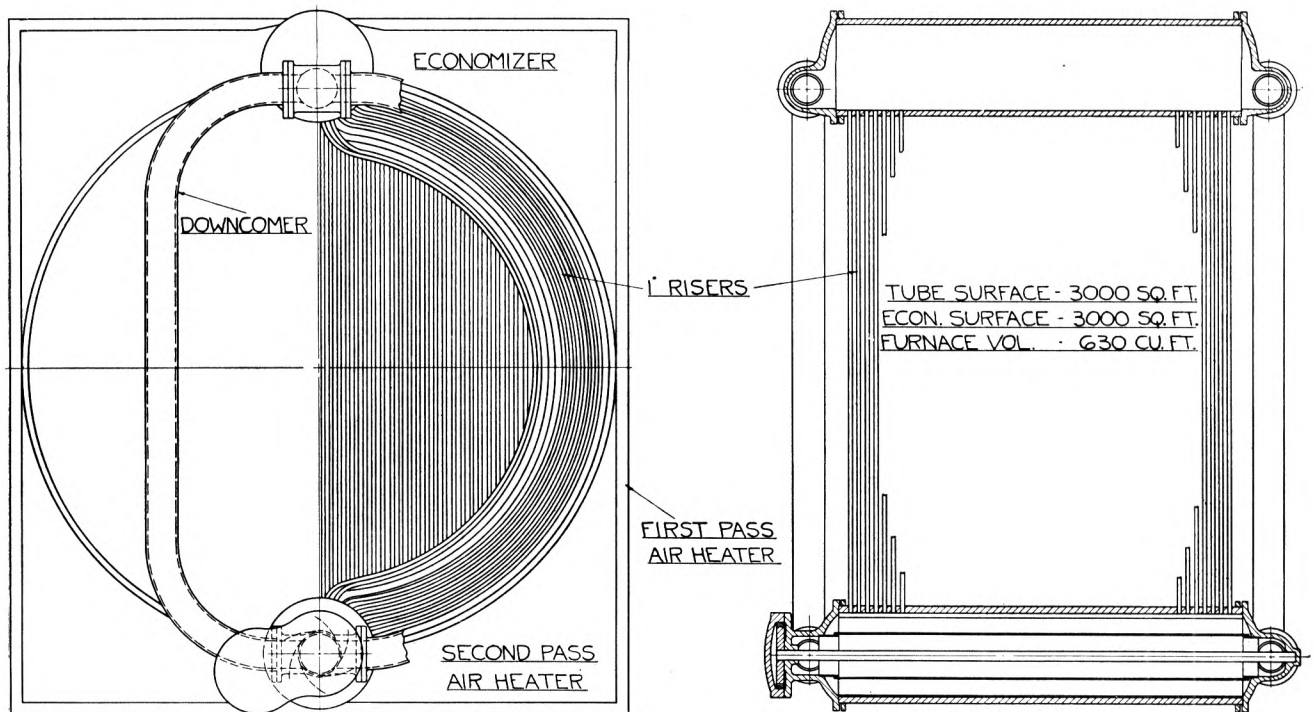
FRONT AND SIDE VIEWS OF PROPOSED TWO-DRUM BOILER
